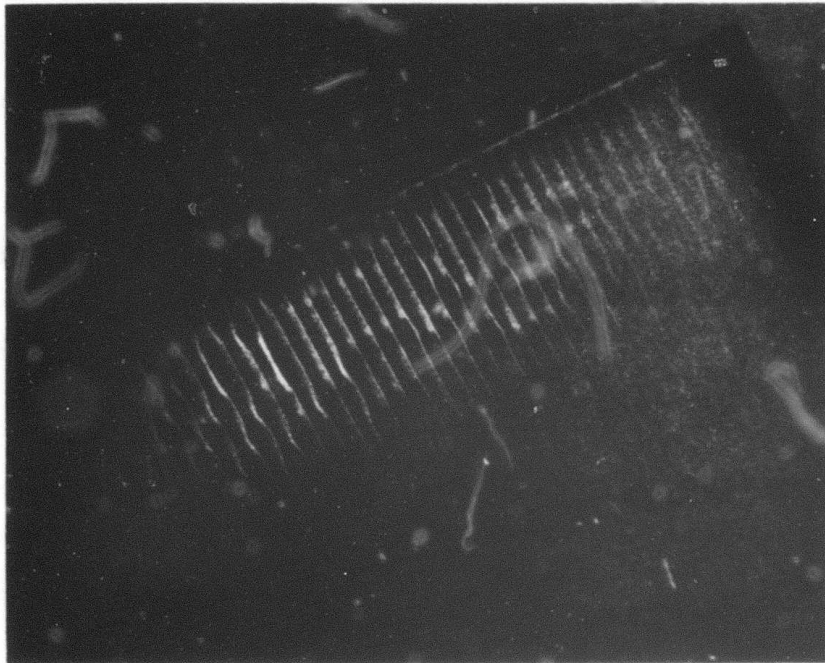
Photo of one edge of correction plate, showing grooves and residue left by machining operation
